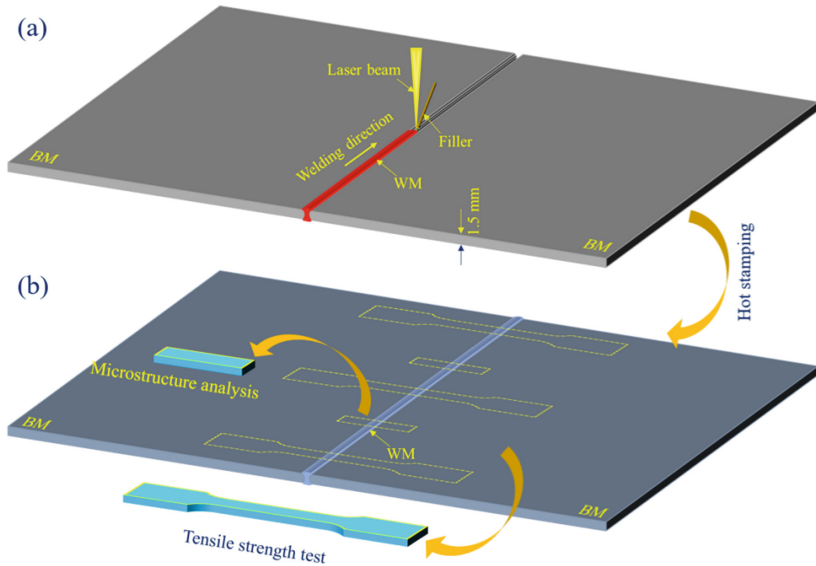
Schematic of the laser welding process and sampling of the specimens for the tensile strength tests: (a) the schematic of the laser welding, and (b) the sampling schematic of the specimens.
